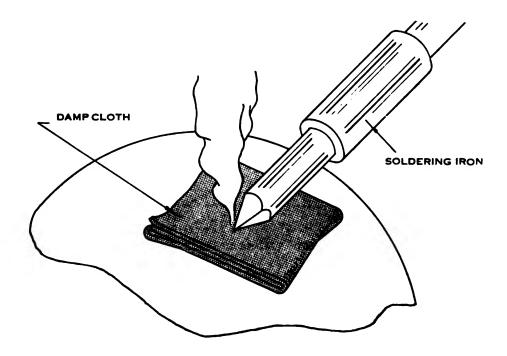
Removing dents with a damp cloth and a soldering iron.
